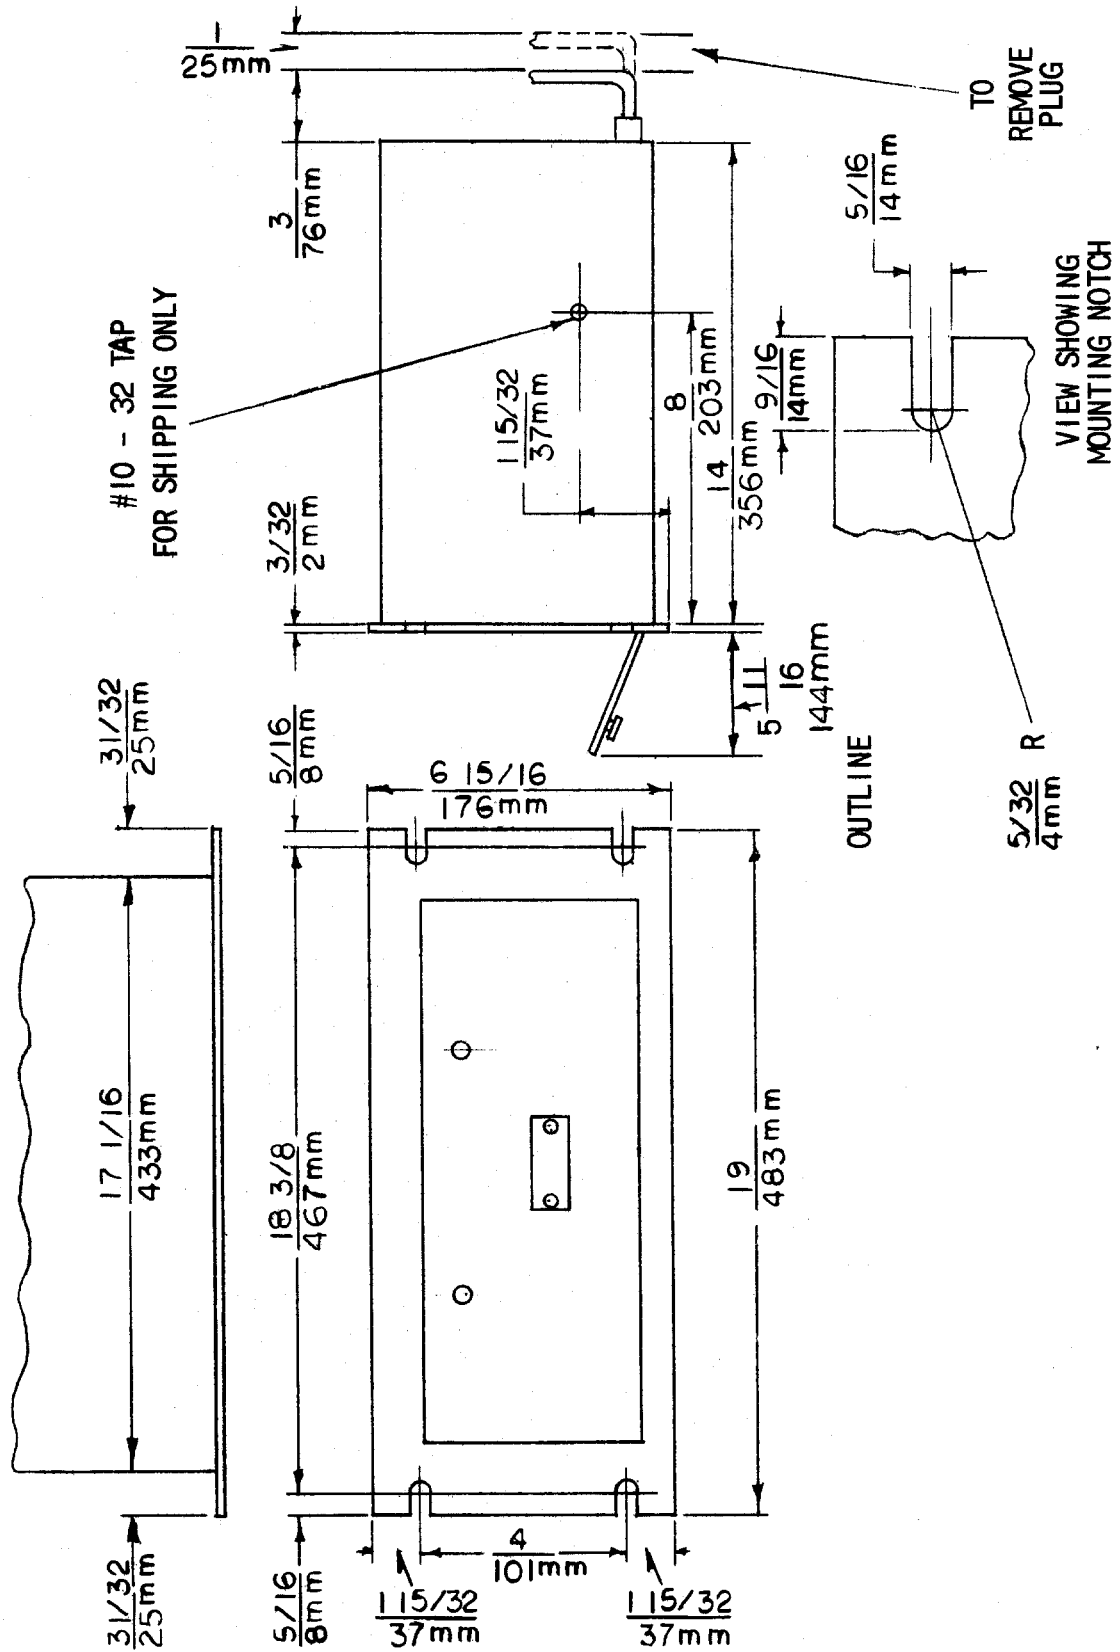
(227A2037-1) Outline and Mounting Dimensions for the SLA51P Relay
